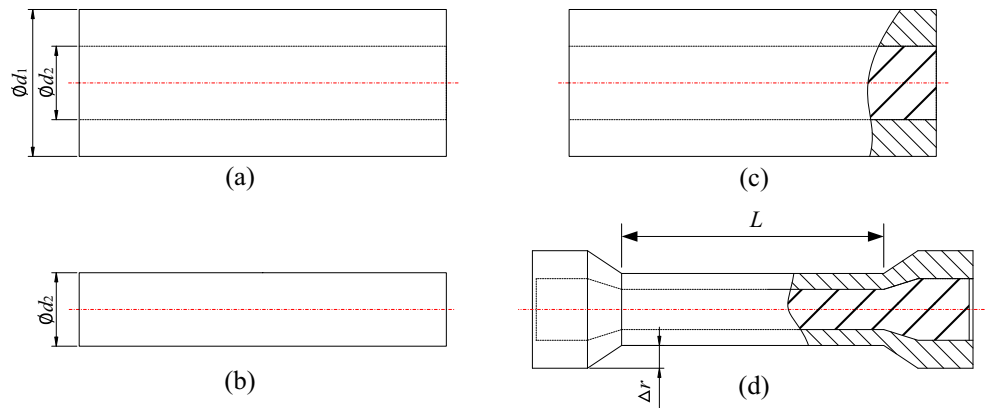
Geometry of the billet and rolled part. a 42CrMo hollow pipe, b Q235 bar, c assembly of the two materials, and d the rolled part
